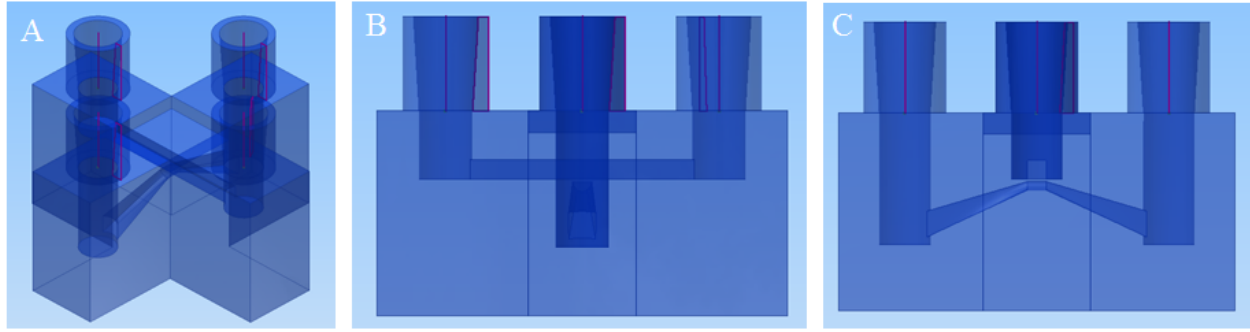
CAD diagram of microfluidic valve – Fig. A) Orthogonal view Fig. B & C) Side views
